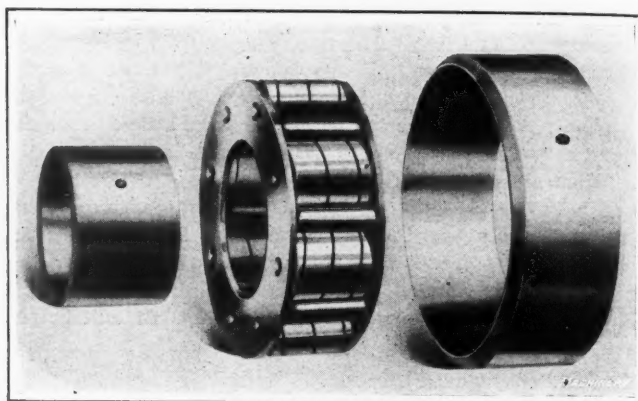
General View of Hyatt Roller Bearing for Machine Tools
